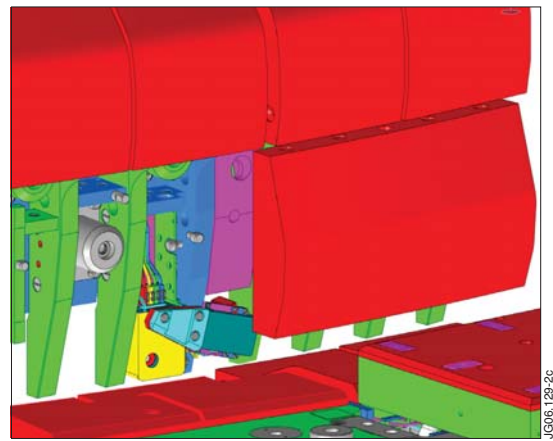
3 dimensional view on QMB in remote area of inner divertor.
